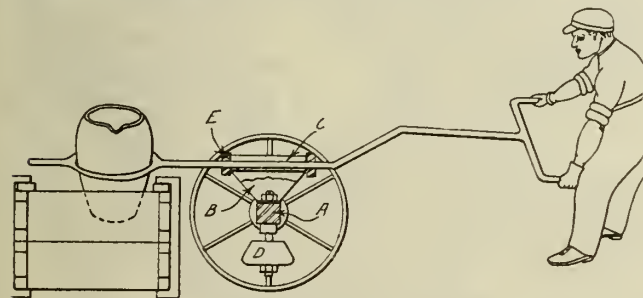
SHOWING SULKY LADLE ARRANGEMENT. A IS THE AXLE, B IS THE SUPPORT FOR SHANK, C IS SLOT IN WHICH SHANK IS HELD.
